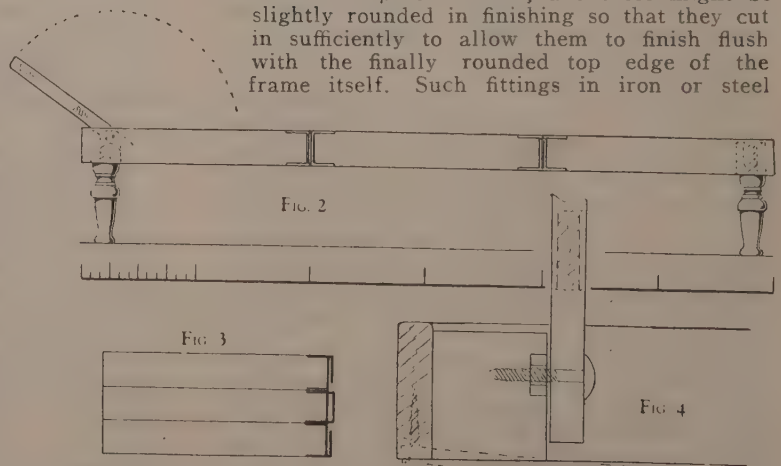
ELEVATION. FIG. 3.—THE THREE PARTS PACKED FOR PORTABILITY. FIG. 4.—PIVOTING ARRANGEMENT.
